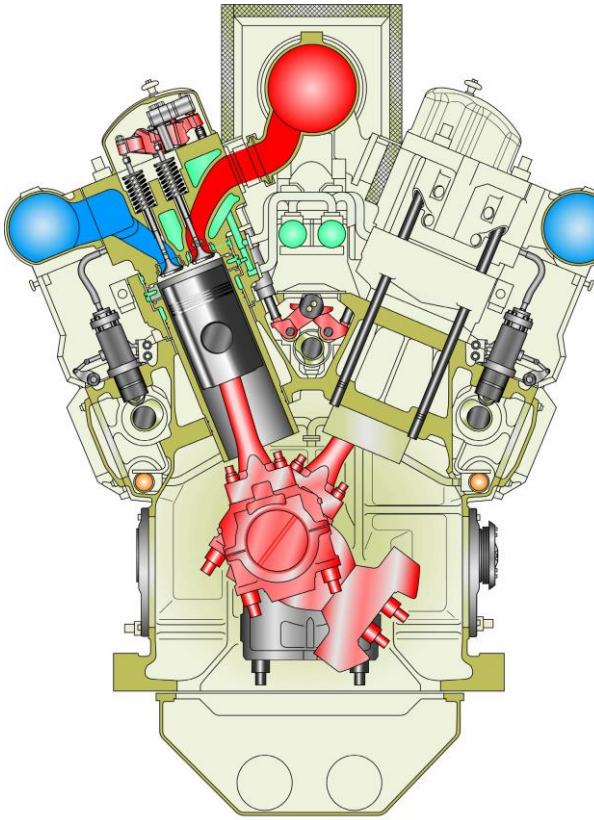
MAN 12V32/40 diesel engine cross section view on coupling side
